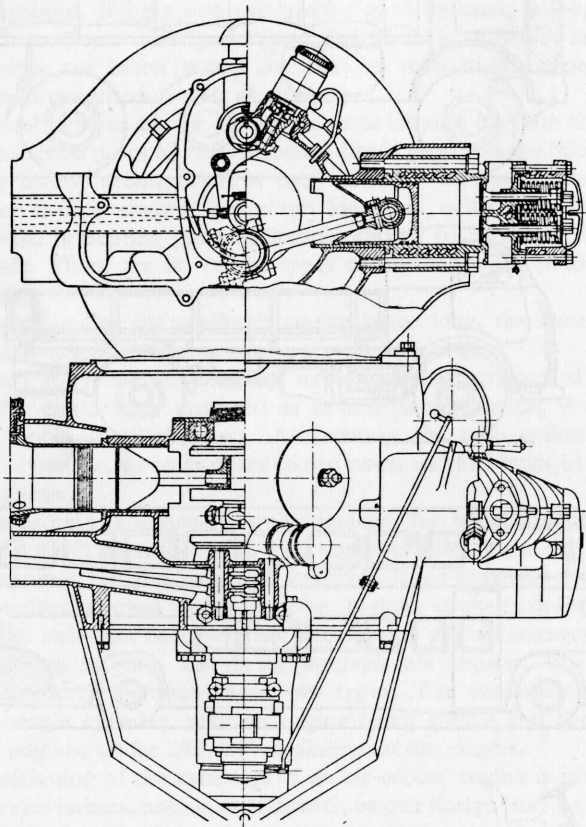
Sectional view of the Tatra 12 (82 × 100 mm) twin cylinder.
